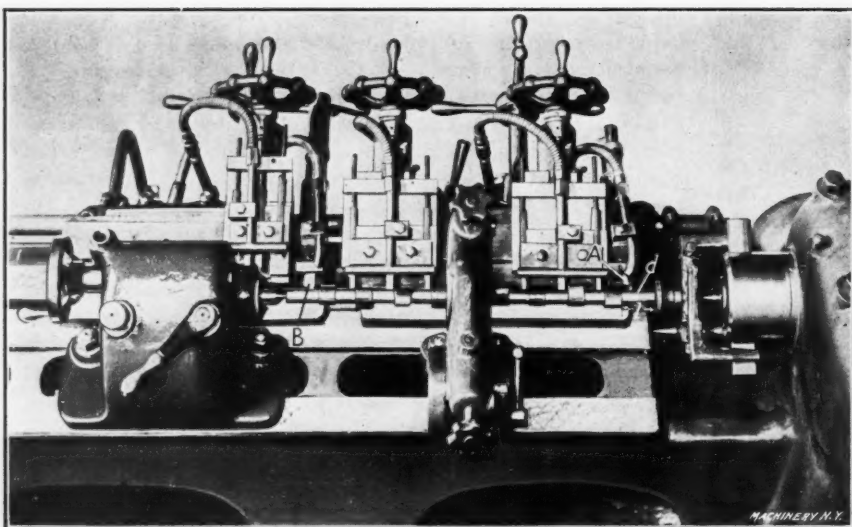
Rear View of a Lo-swing Lathe arranged for Turning Camshafts—First Operation
